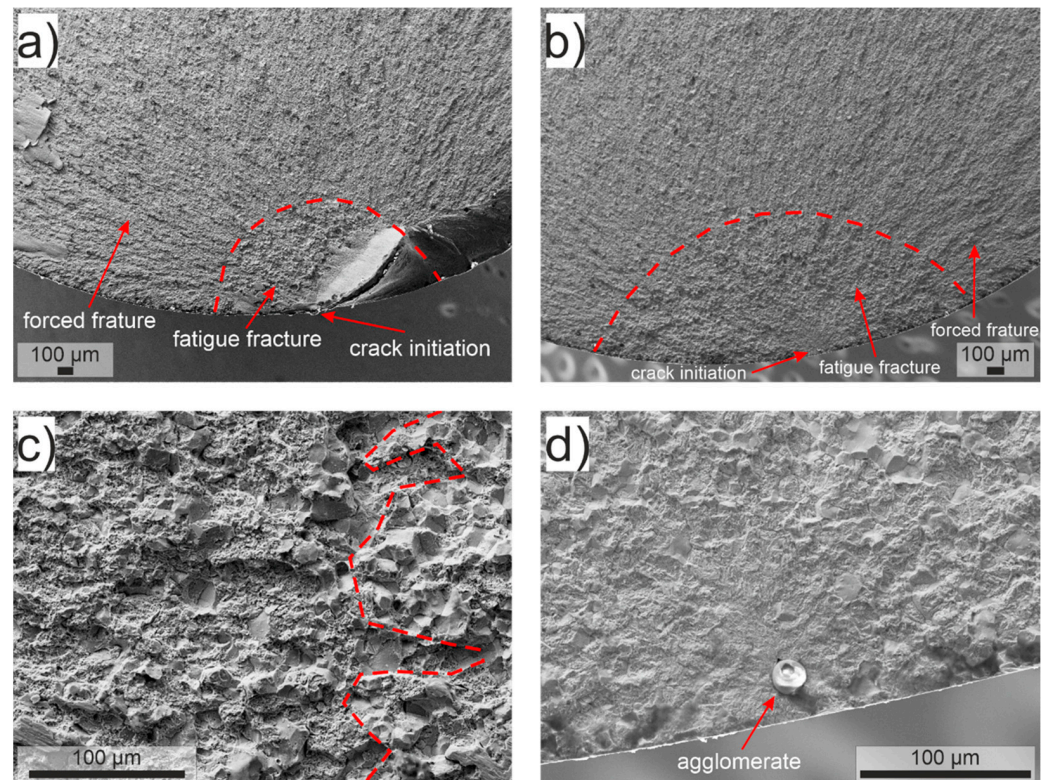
Typical fracture surfaces of fractured rotating bending fatigue specimens after loading. (a) Fatigue fracture surface of a non-charged treatment A specimen, $N_f = 31,084$. (b) Fatigue fracture surface of a charged treatment A specimen, $N_f = 51,604$. (c) Transition from fatigue fracture (right side) to forced fracture (left side) for the specimen from (a). The partly intergranular fracture is discernible by the facets of the former austenite grains. (d) Detail of the crack initiation from an agglomerate for the specimen from (b).
